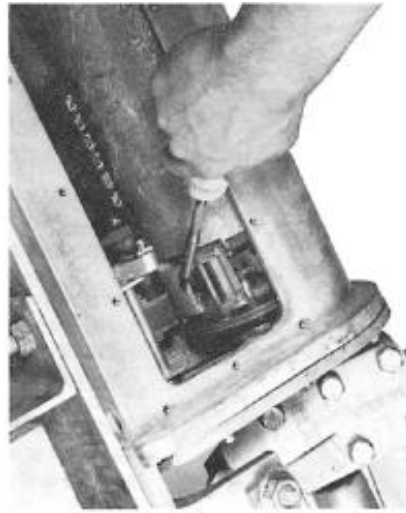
Screwdriver being used to unlatch actuating mechanism.
